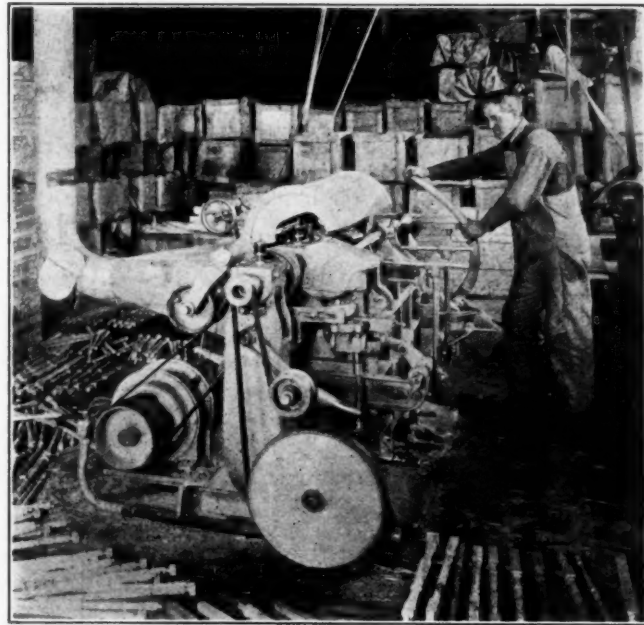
MOTOR-DRIVEN AUTOMATIC SHAPING LATHE
